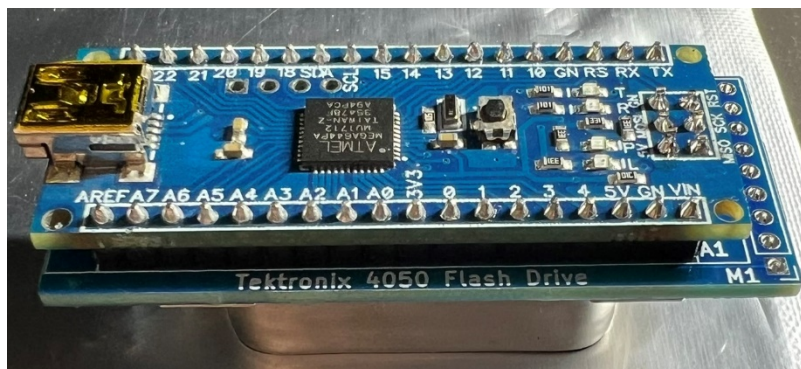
CONTROLLER assembled to GPIB Interface PCB v1A and ISP header pins soldered and trimmed
